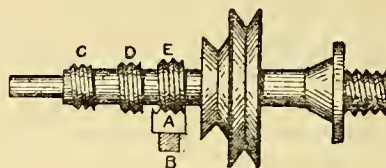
OLD STYLE OF TRAVERSING MANDREL.
